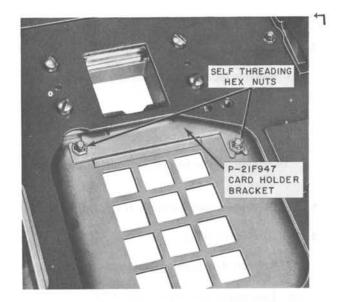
Card Holder Bracket Installed (1A2) ↓
